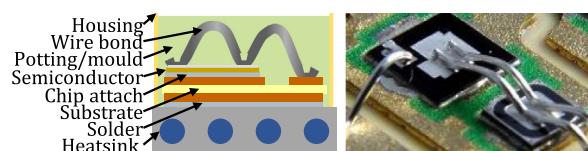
Left: Cross-section of a standard power module package; Right: Direct bonded copper (DBC-) substrate with soldered chips and bonded Al wire loops.
